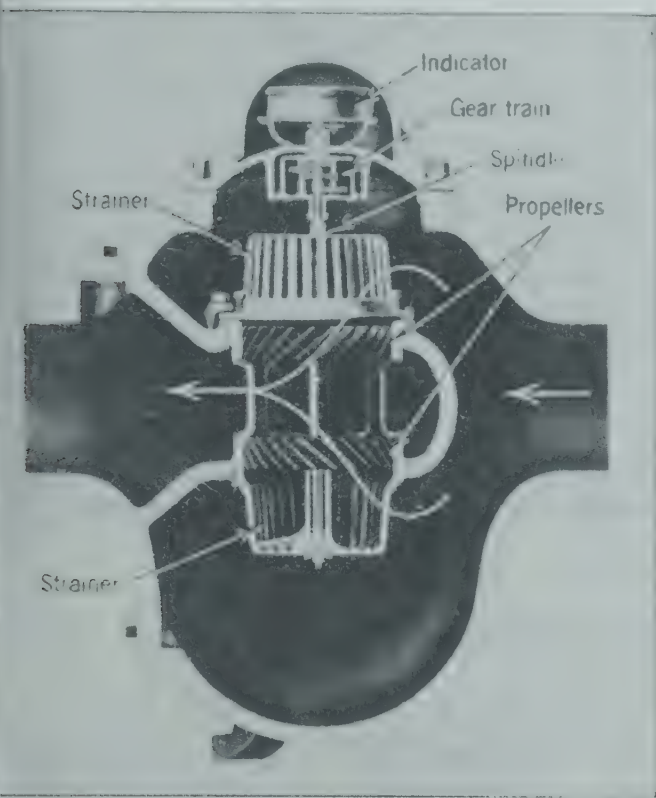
Cutaway view of propeller meter. (Neptune Meter Co.)
